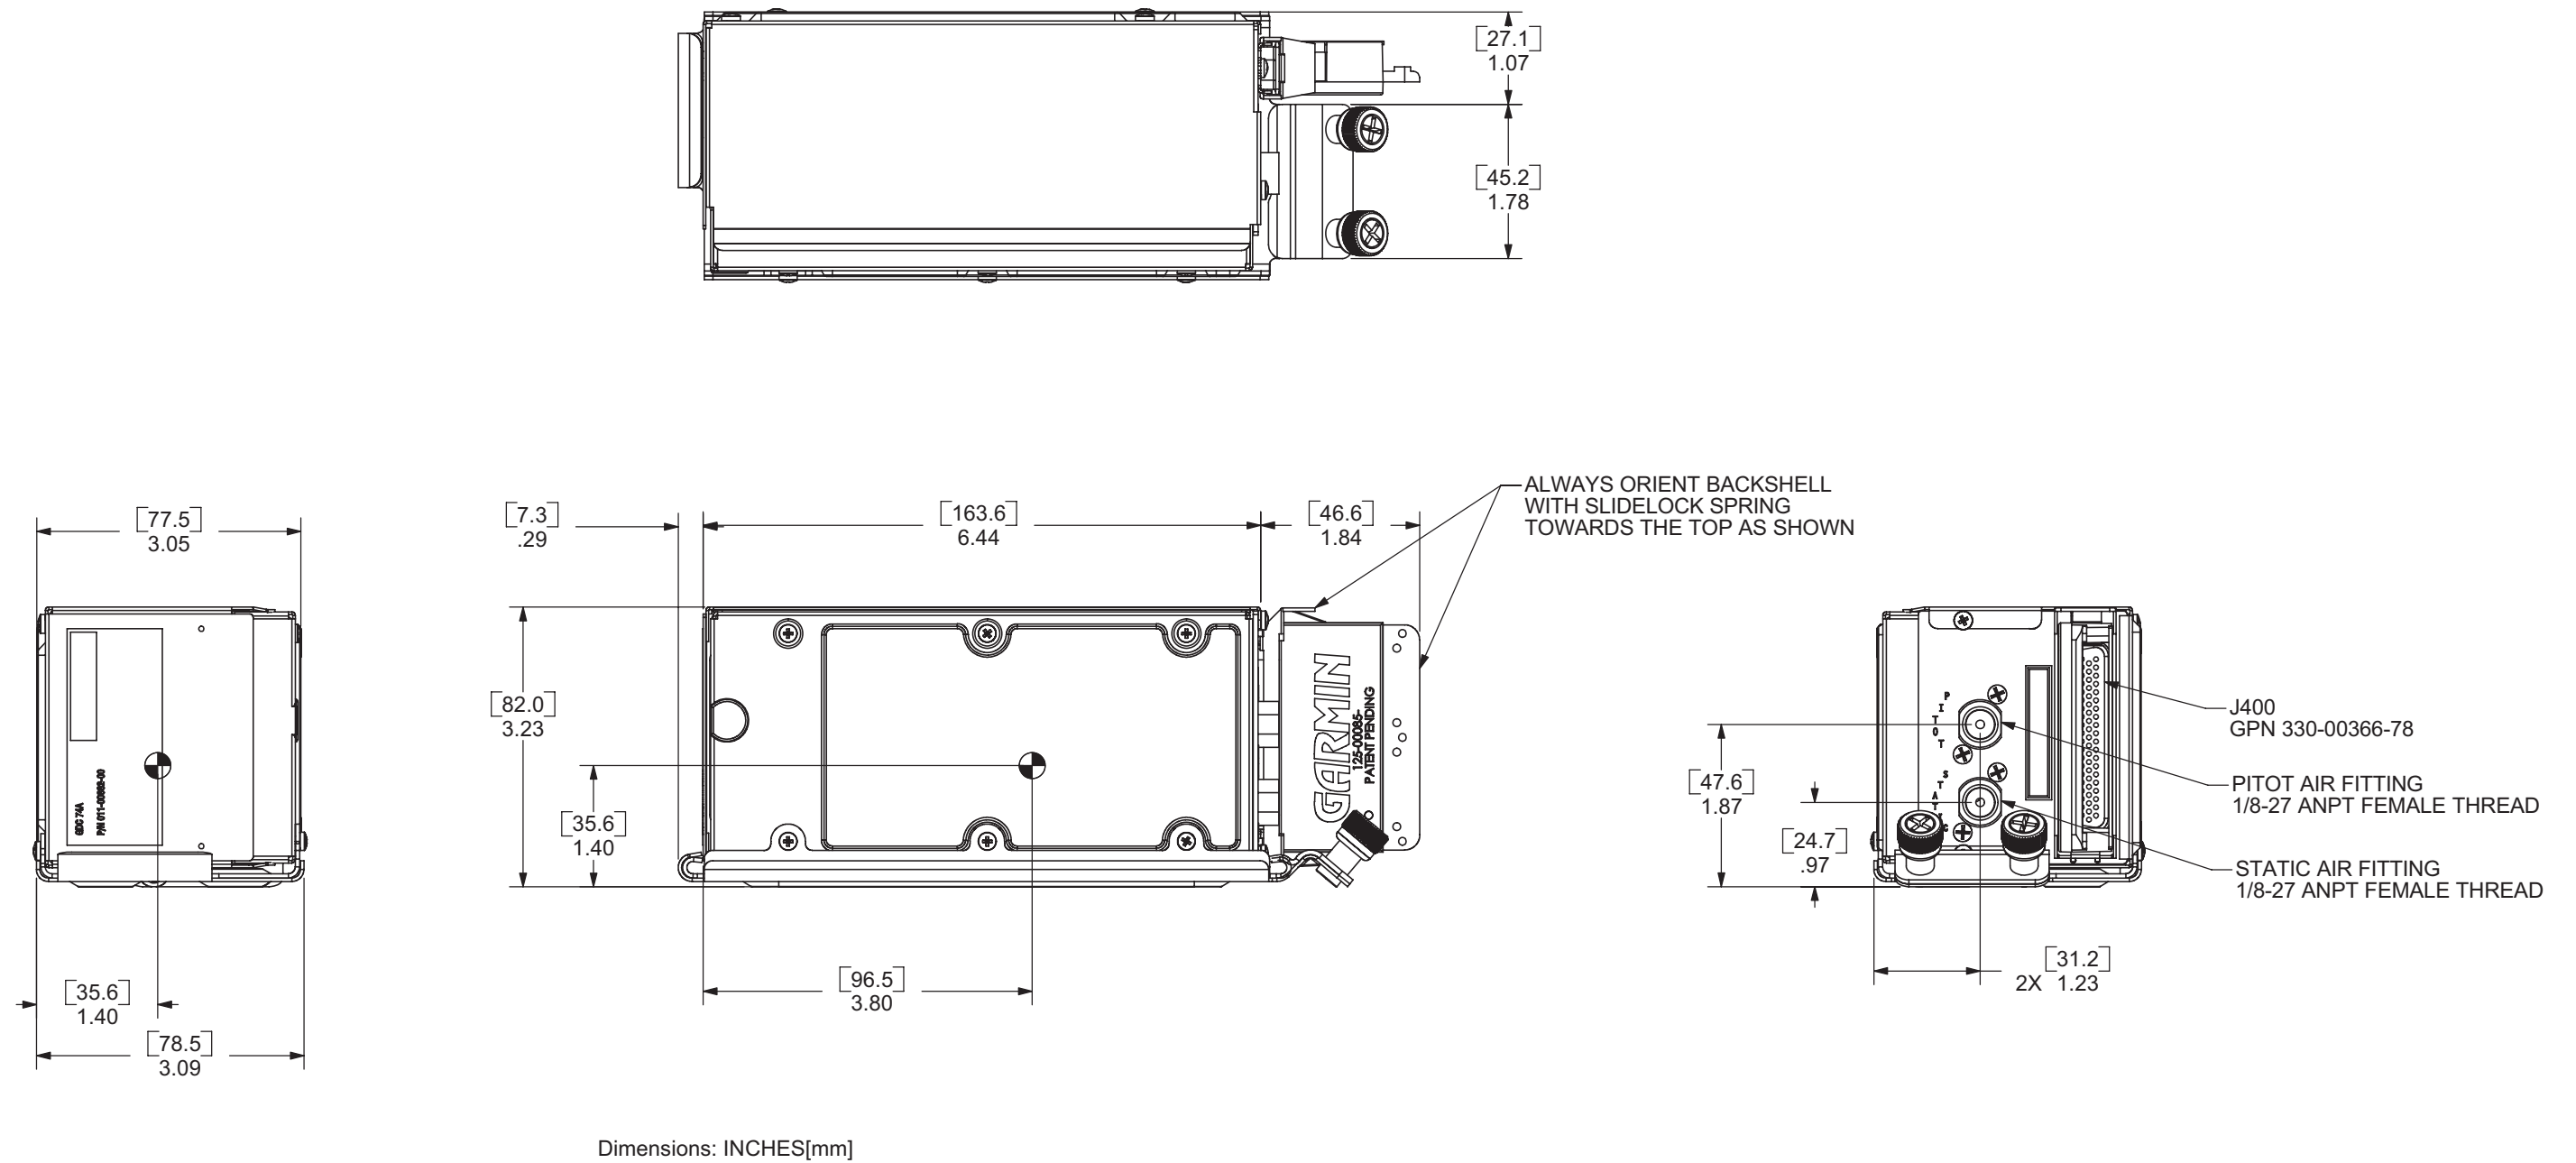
GDC 74A Outline Drawing for Remote Mounting Option II (Sheet 1 of 2)
